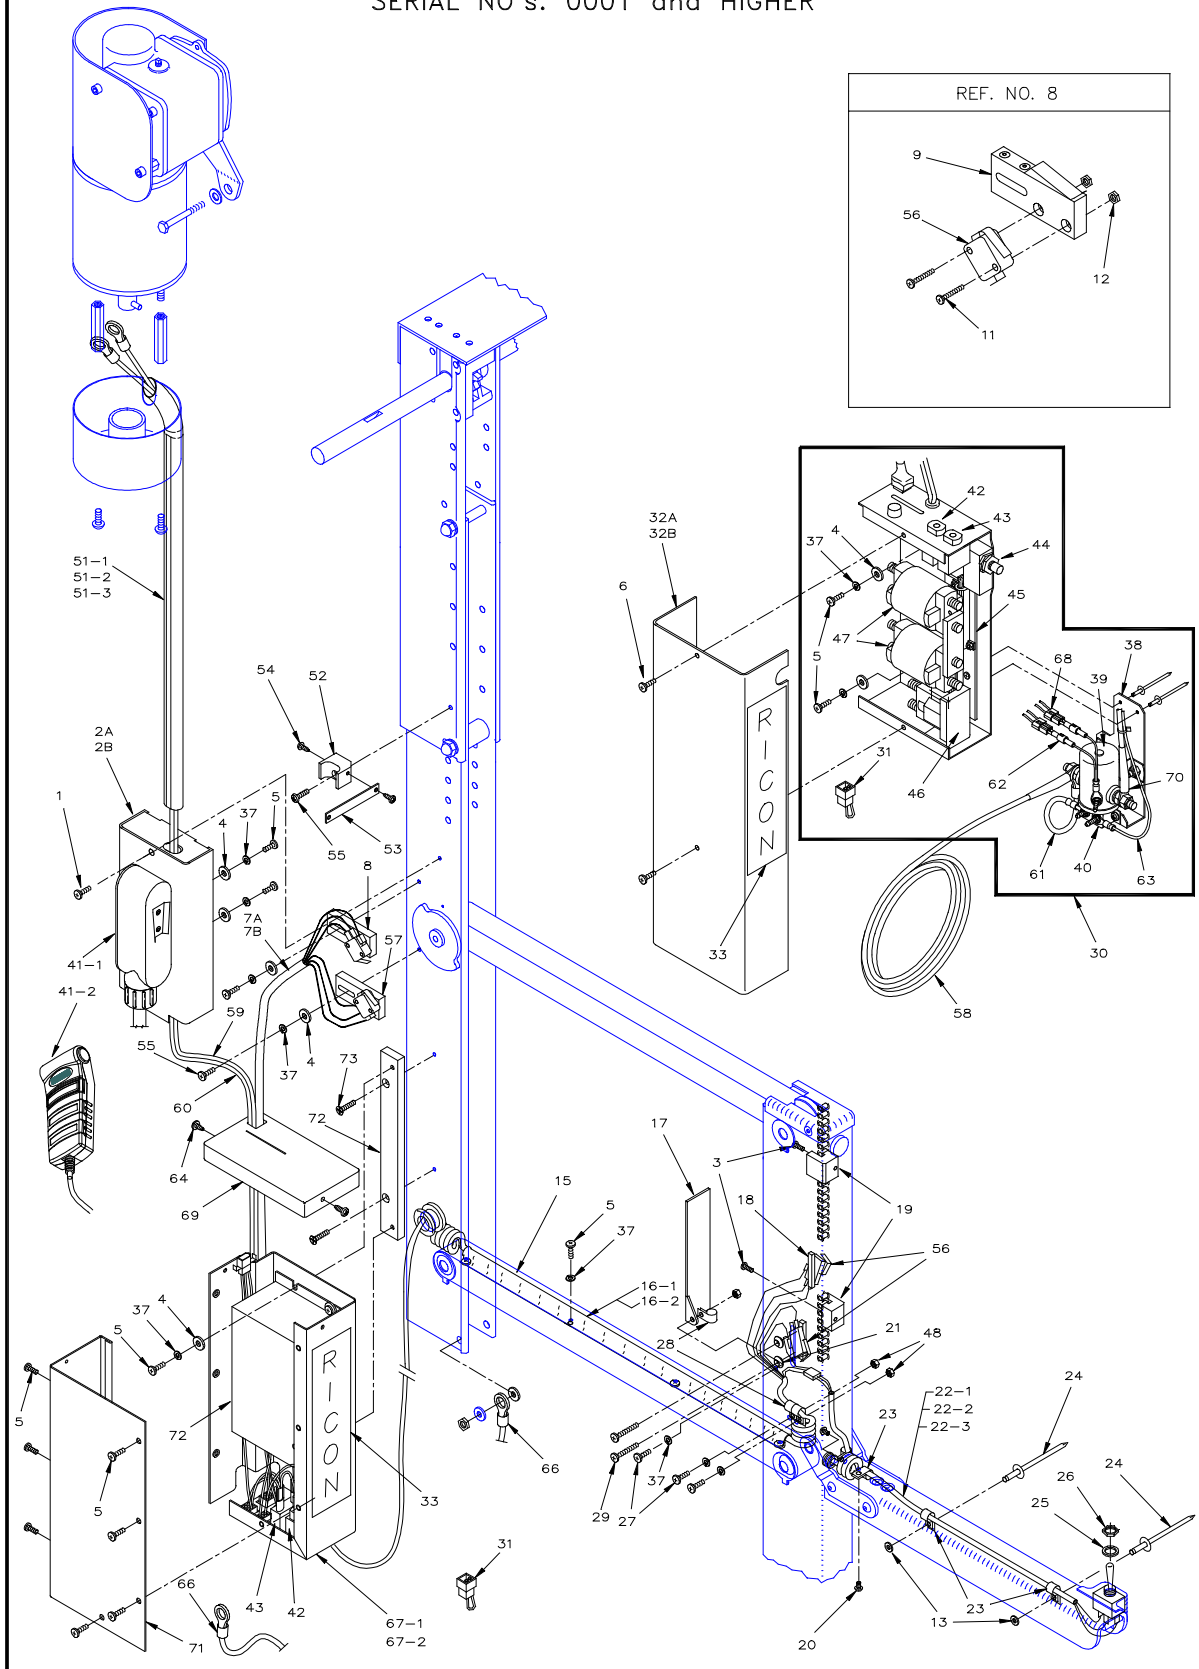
UNI-LITE ELECTRICAL ASSEMBLY
